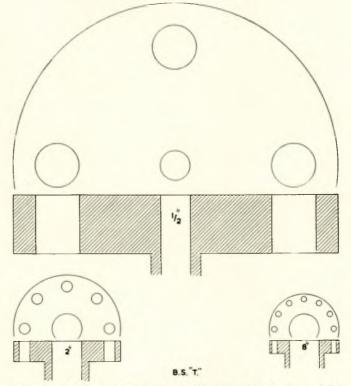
Steam pipe flanges from Table T, B.S.10, drawn with a common bore diameter to show their dissimilarity of design
